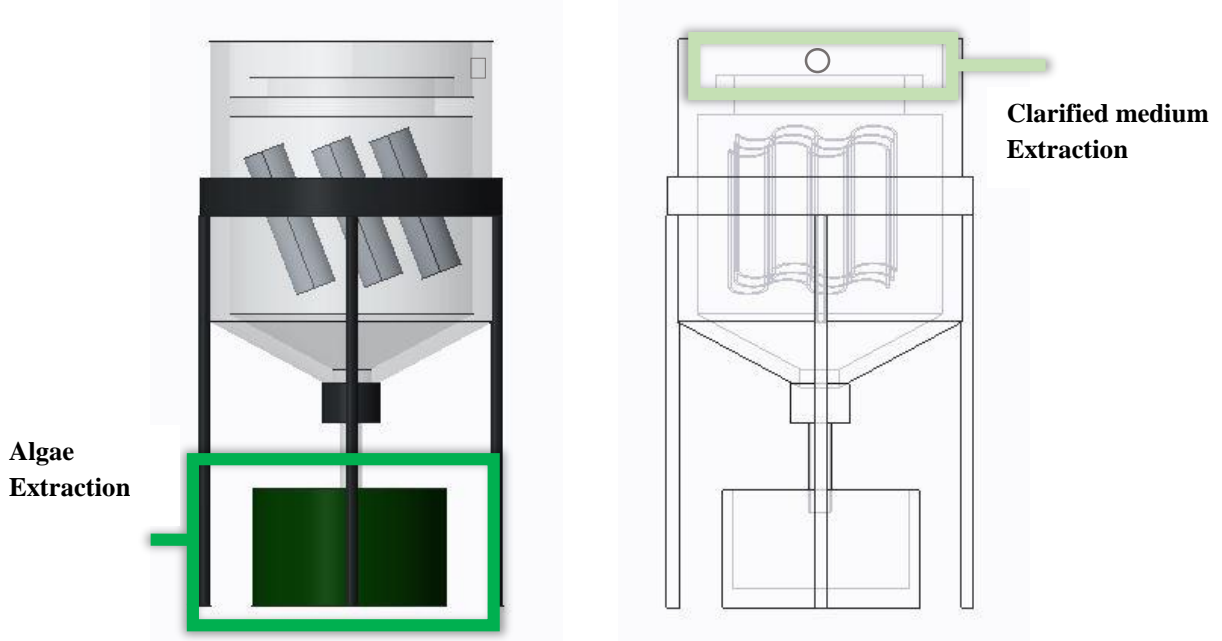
(Left) Color view of harvesting assembly, (right) hidden line view of harvesting assembly.
